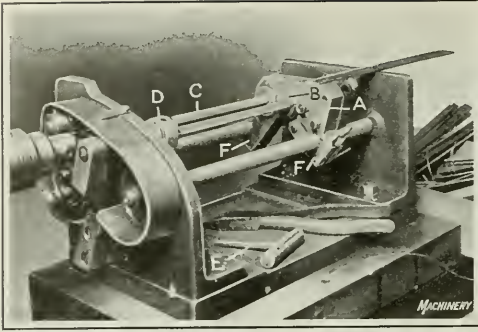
Winding Fixture used on a Lathe for making Rheostat Coils
